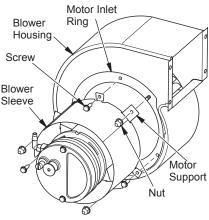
Fan, Motor Shaft, and Setscrew Location
